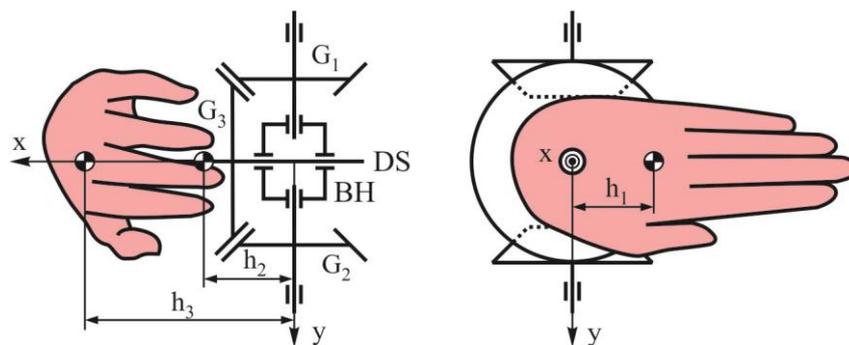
Kinematic scheme of the differential mechanism: G_1 and G_2 – driving bevel gears, G_3 – driven bevel gear to which the robot hand is attached, DS – driven shaft and BH – bearing housing
